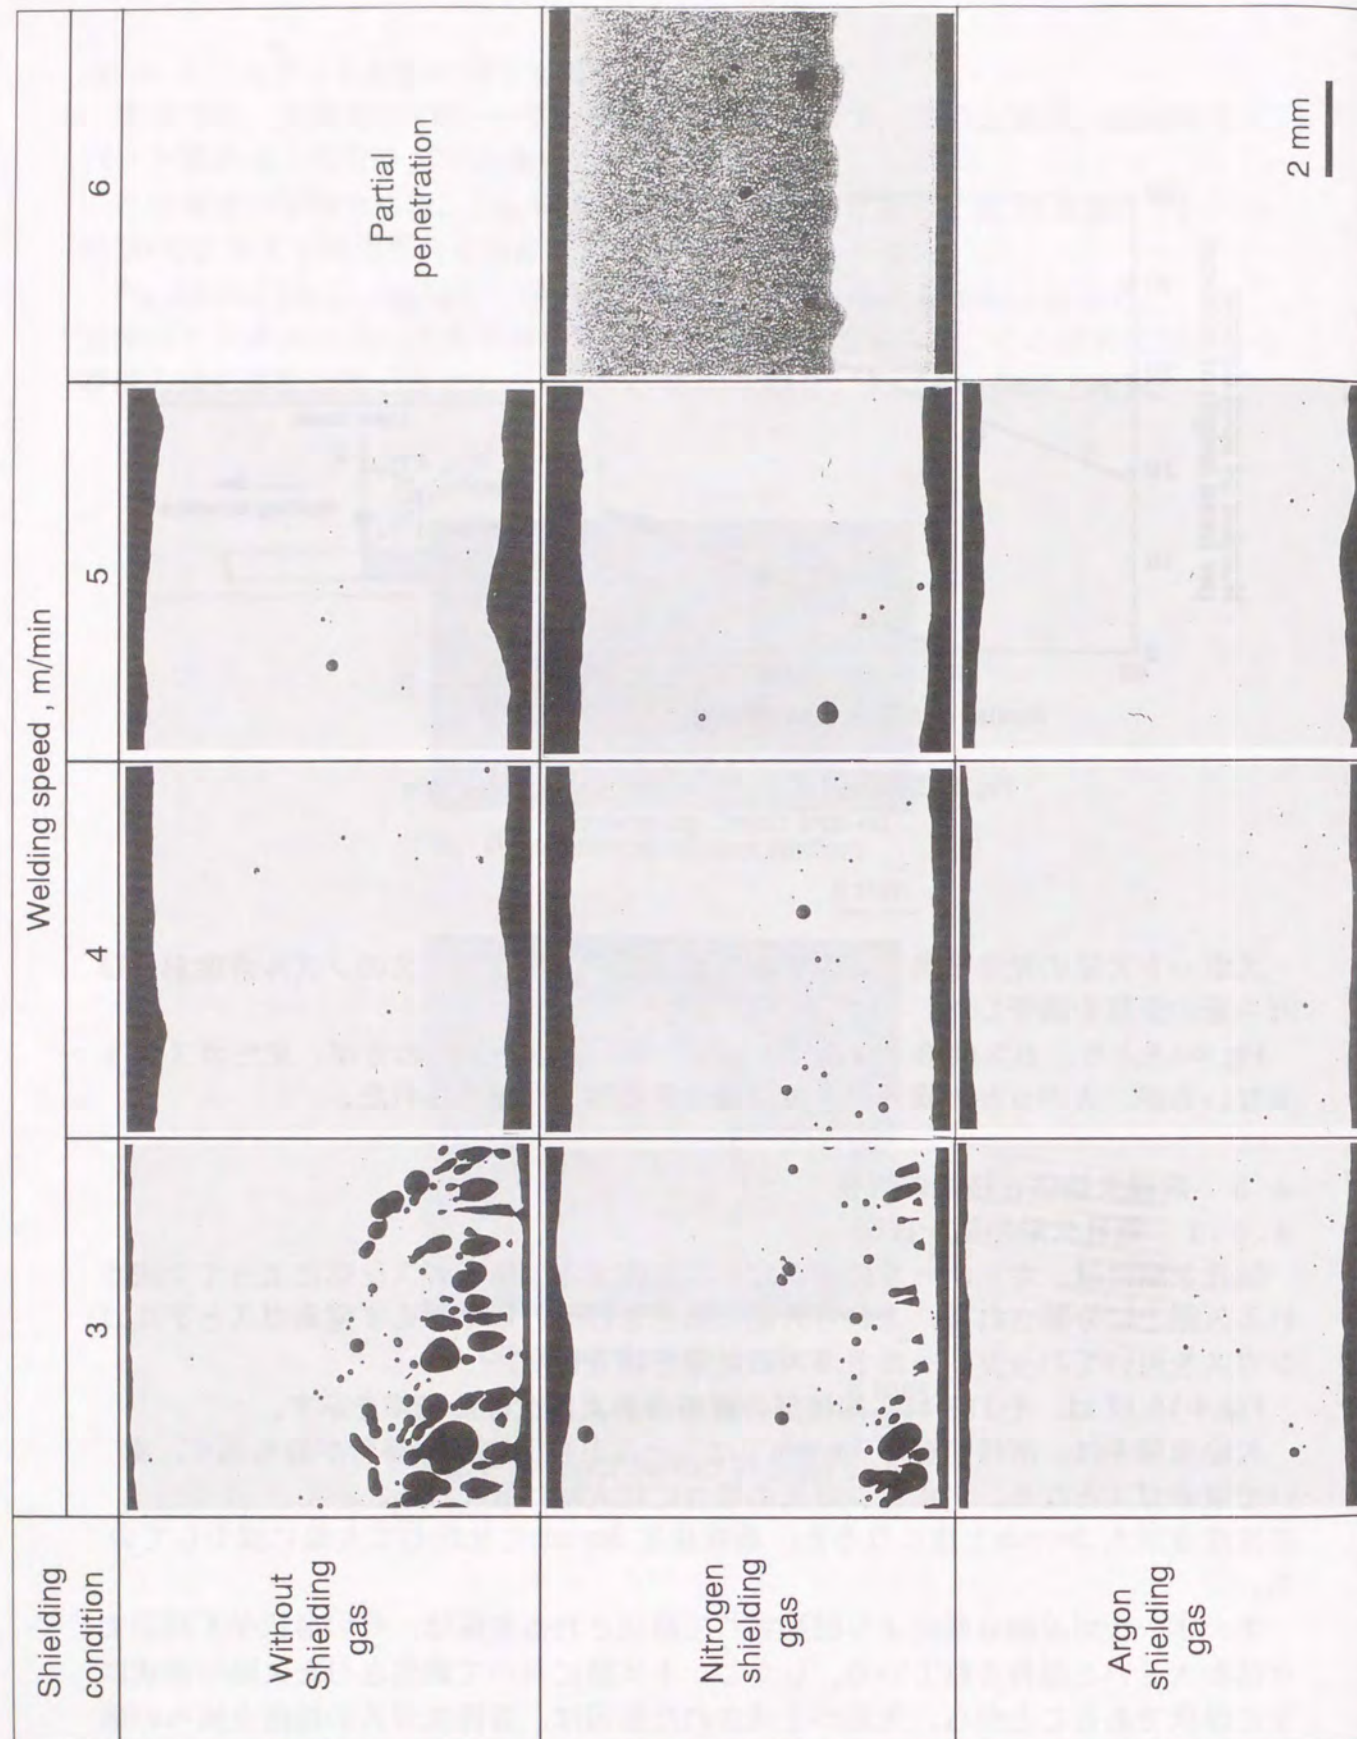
Effect of shielding gas on blow holes in longitudinal macrosections of laser weld metals
